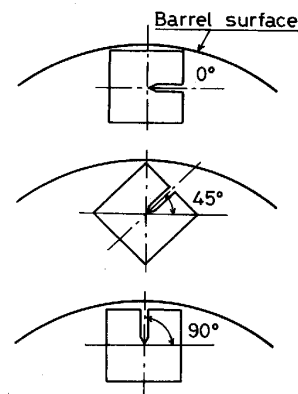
Directions of notches of test pieces taken from part near the surface of the roll.
